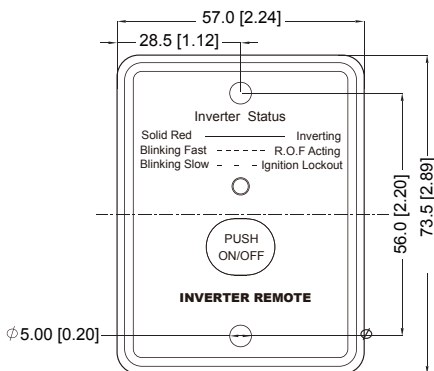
CR8 Mechanical drawings (Unit: mm [inch])
